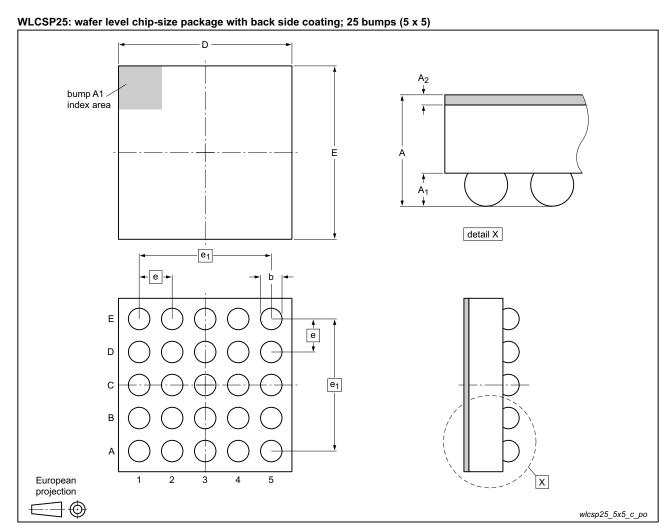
Package outline IP4856CX25/C (WLCSP25 with back side coating)
